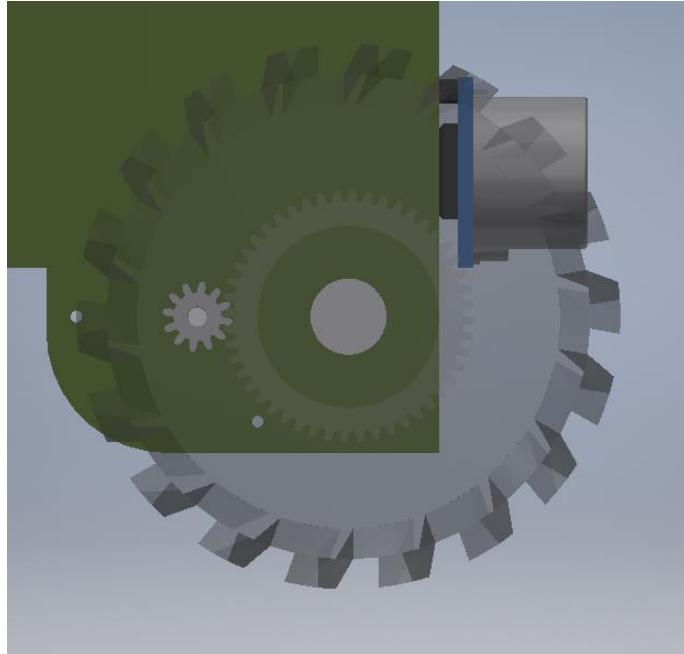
The drivetrain for the front right wheel is shown inside of the wheel
